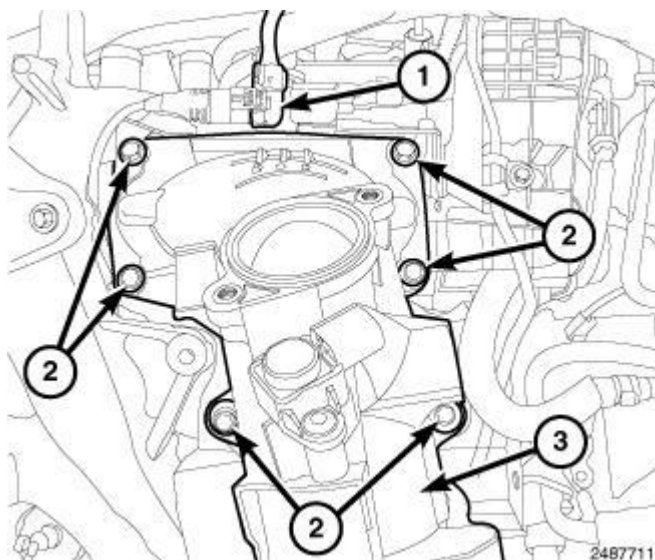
Fuel Rail, Bolts, High Pressure Fuel Tube & Pump
